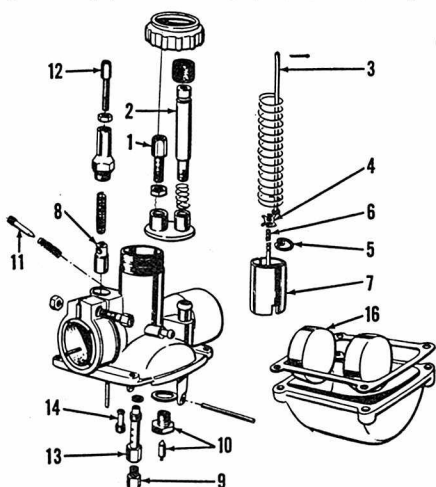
Exploded view of Mikuni VM carburetor used.
